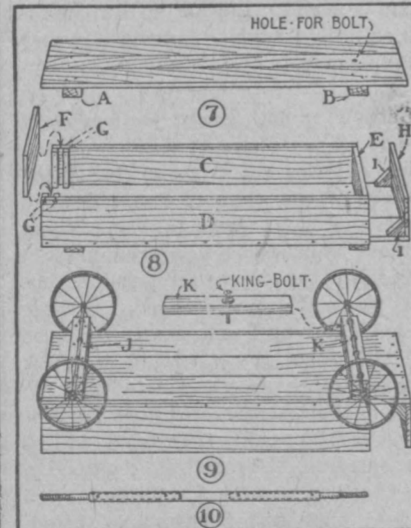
shows the wagon bed. Fasten the boards together by means of the two-by-four crosspieces A and B. Then cut the side boards C and D and nail them to the edges, and cut the end boards E and F to fit between. Fasten end B between the sides, and form grooves by means of the strips G (Fig. 8) for the end F to drop into. Dashboard H is of the same size as E. Brace it with the brackets I.
